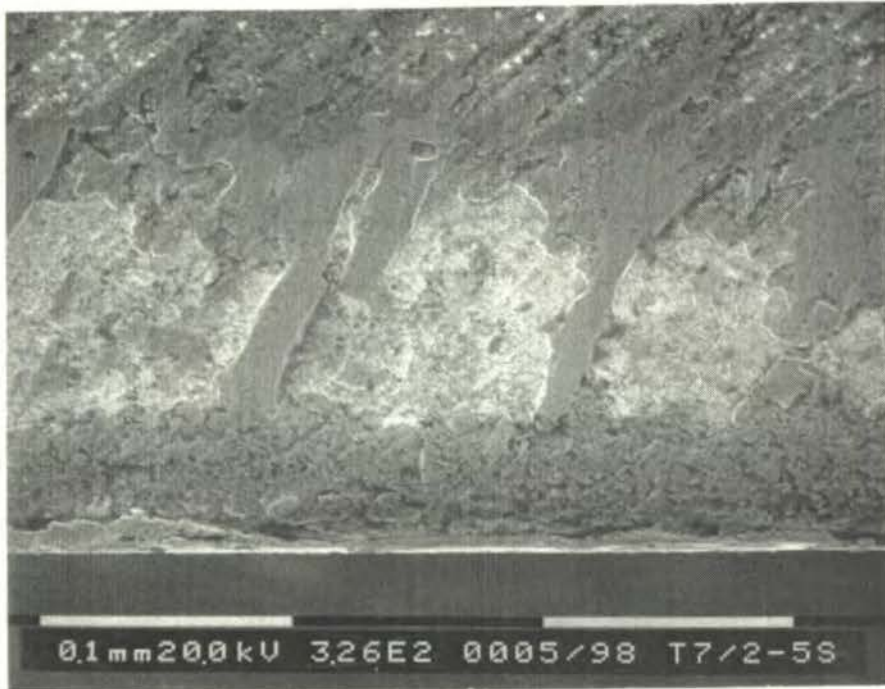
14 Workpiece galling and associated substrate plucking on the rake face of KC994M tool within first 5 seconds of machining Inconel 718 at 50 m/min and 0.08 mm/tooth.
